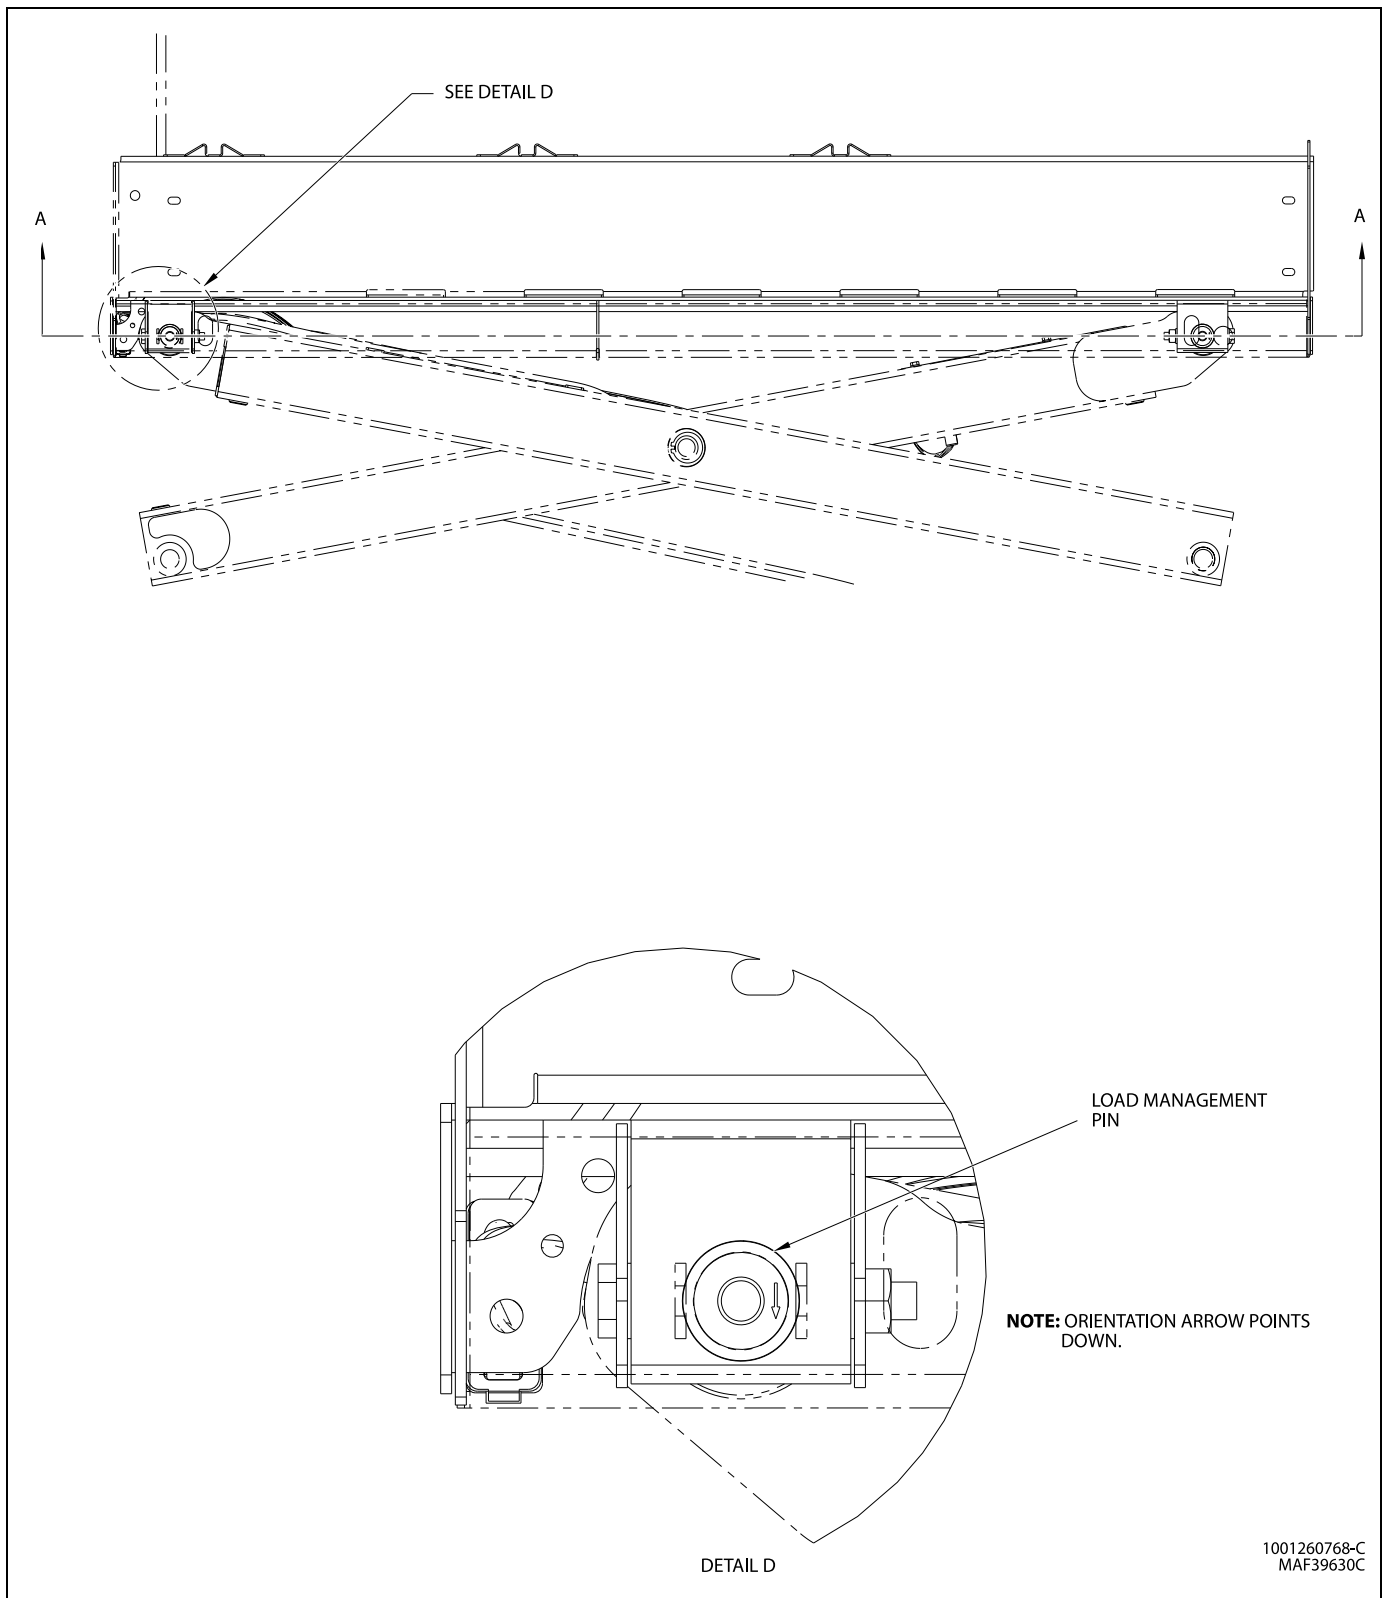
LSS and Platform Assembly - Installation/Removal - Sheet 1 of 4
